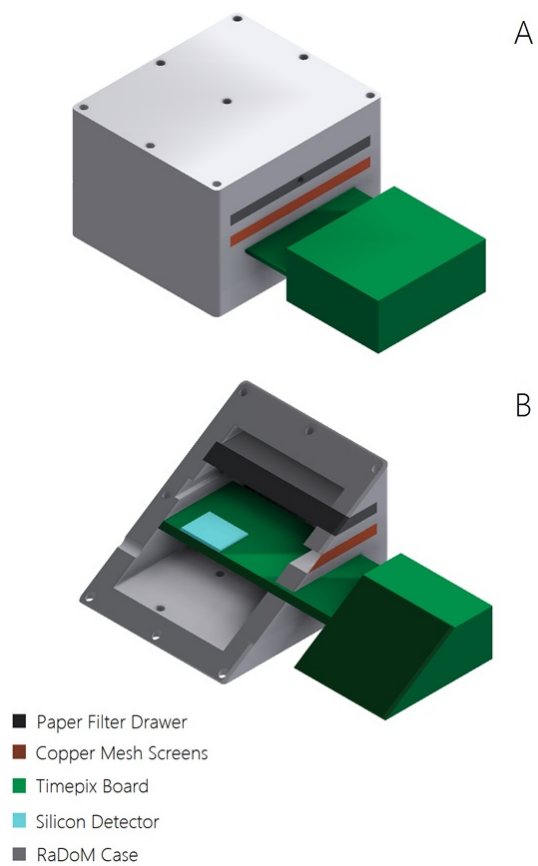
3D model of RaDoM. A): assembled view; B): cross sectional view.
